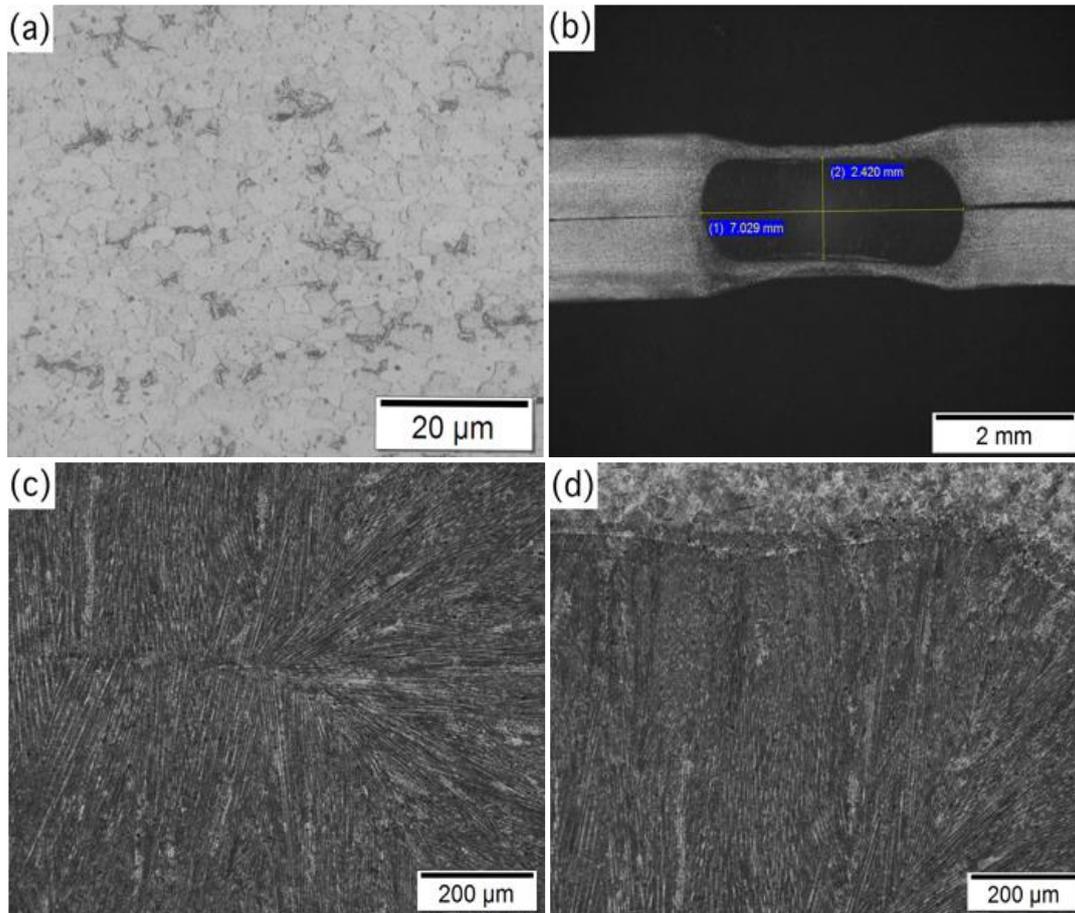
Microstructure of HC420LA steel, (a) as received; (b) nugget with dimensions; (c) melting point of the plates; (d) heat affected zone.
